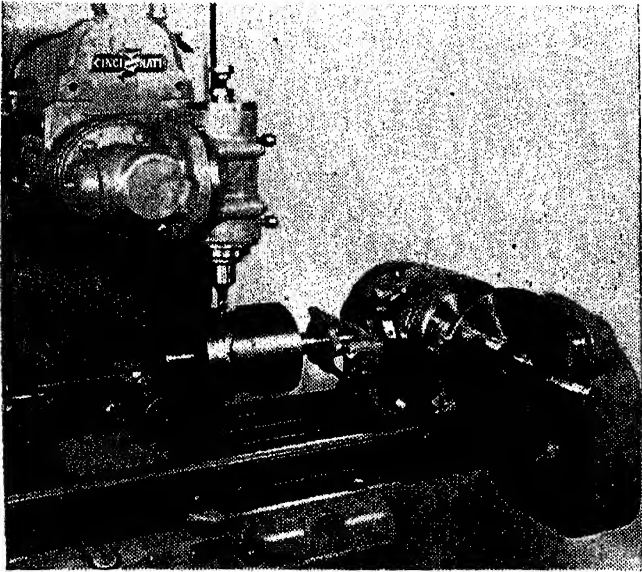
A universal high speed milling attachment and end mill and dividing head with helical milling attachment on a plain knee and column type milling machine for end milling a cam track. (Courtesy The Cincinnati Milling Machine Co.)
